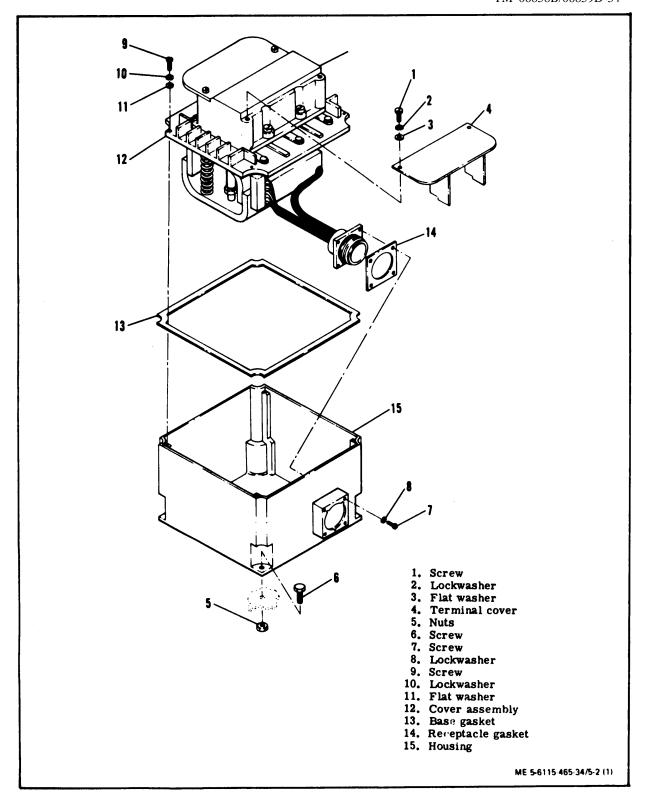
Main Load Contactor, Exploded View (Sheet 1 of 3)
